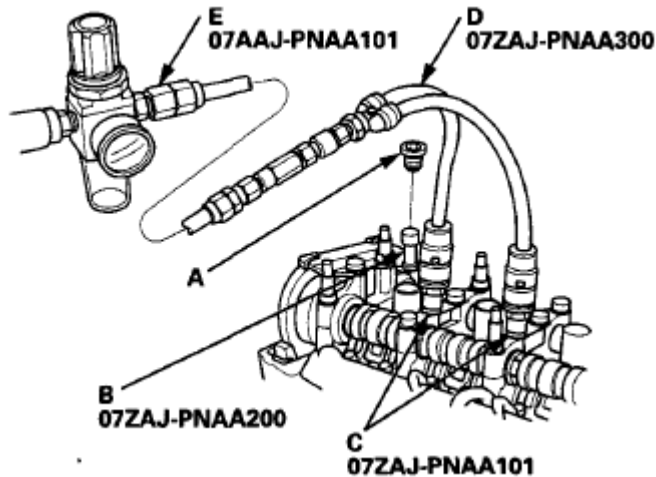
Identifying Sealing Bolt And VTEC Air Stopper
